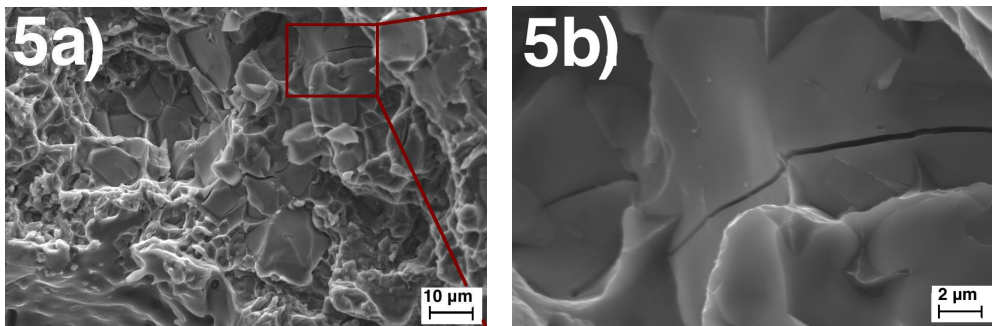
Transgranular and intergranular cracks of as welded AA6082.52-T6.
